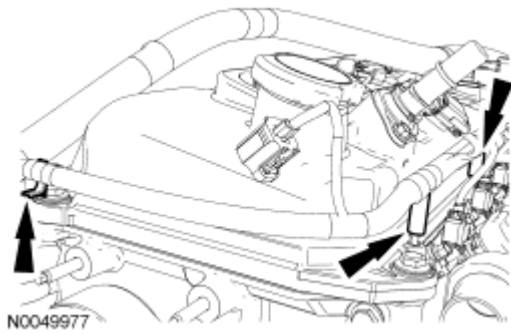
Detaching Wiring Harness Retainers From RH Valve Cover Stud Bolts
